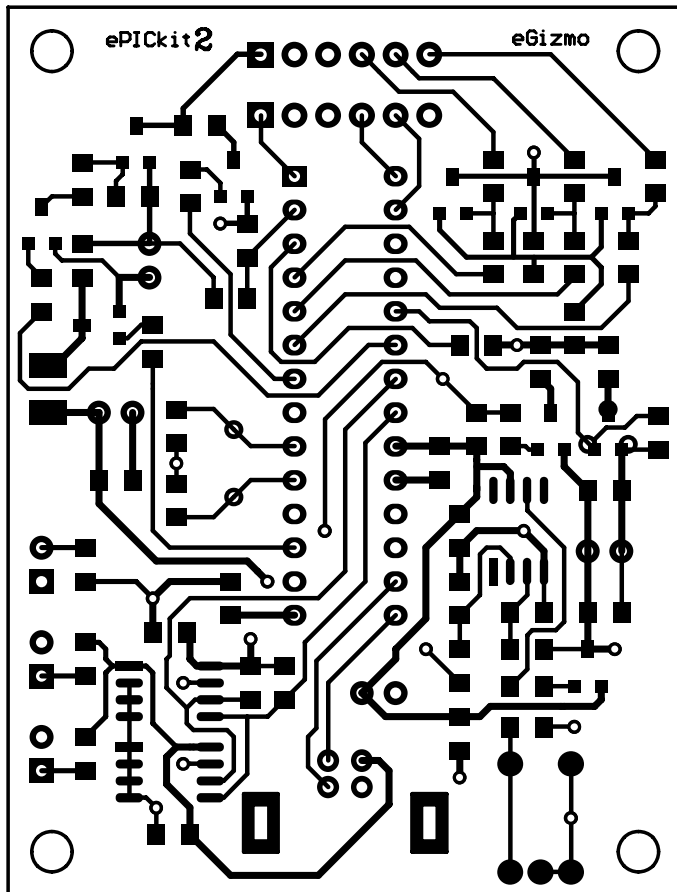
ePIC-KIT2 PCB Copper Pattern (Bottom Layer)
